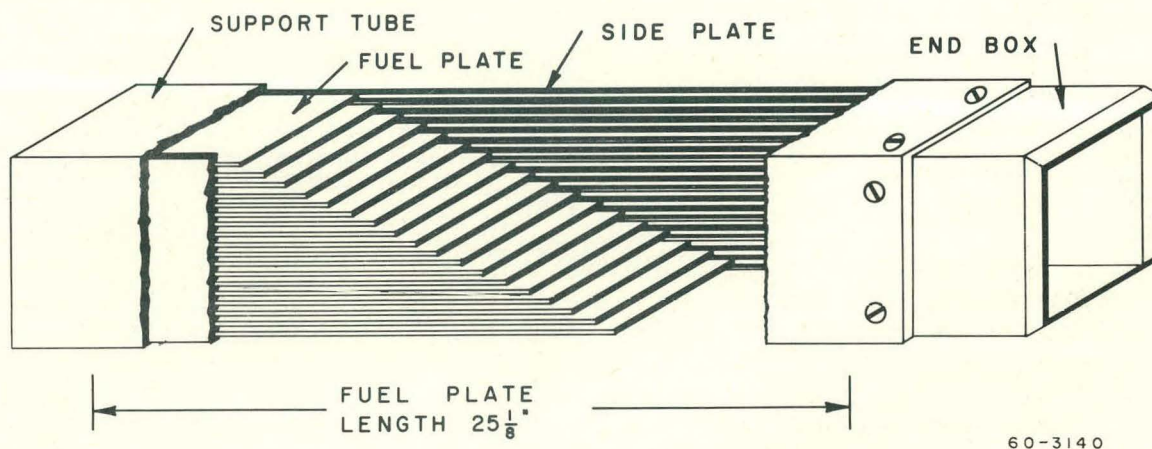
Cross Section of the Spert Type "D" Fuel Assembly
